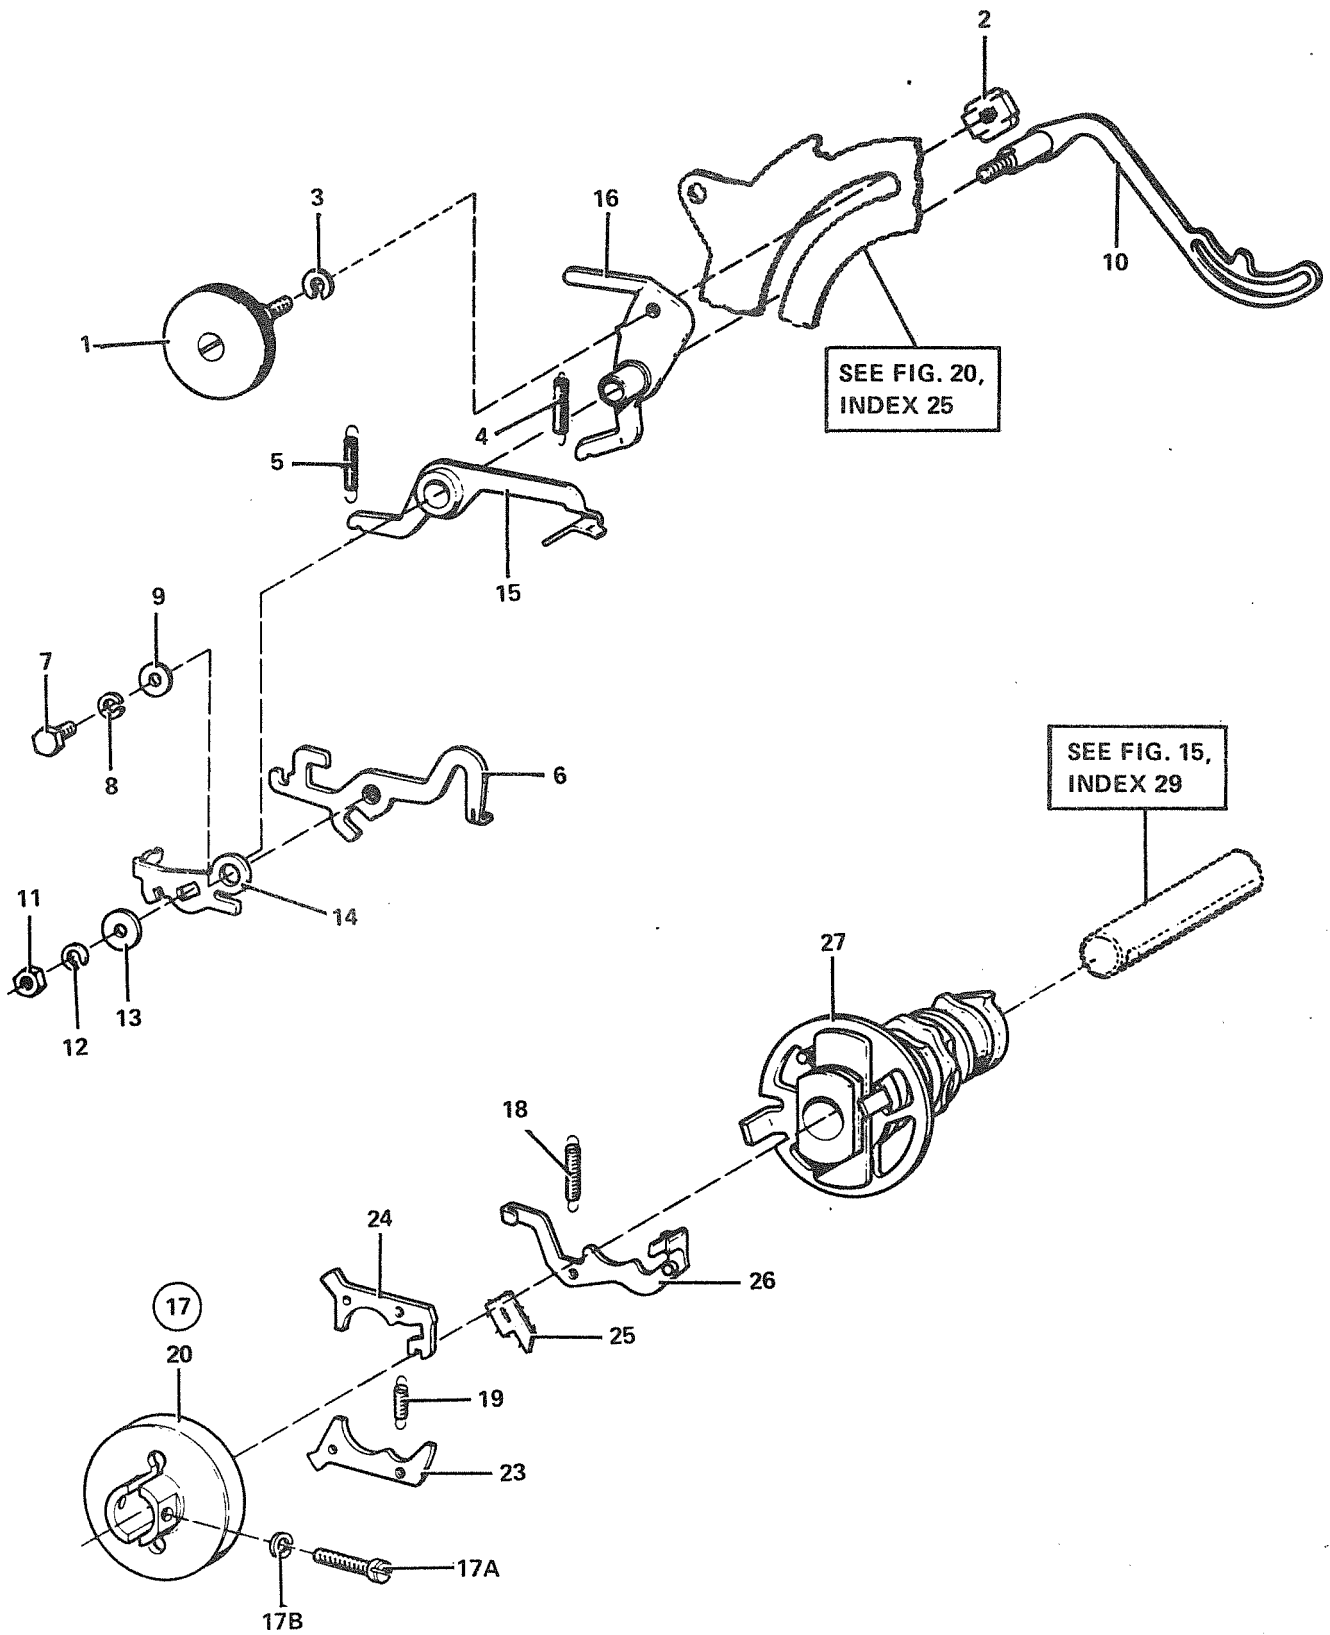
PRINTER- CLUTCH AND CAMSLEEVE MECHANISM. SEE LIST 21.
